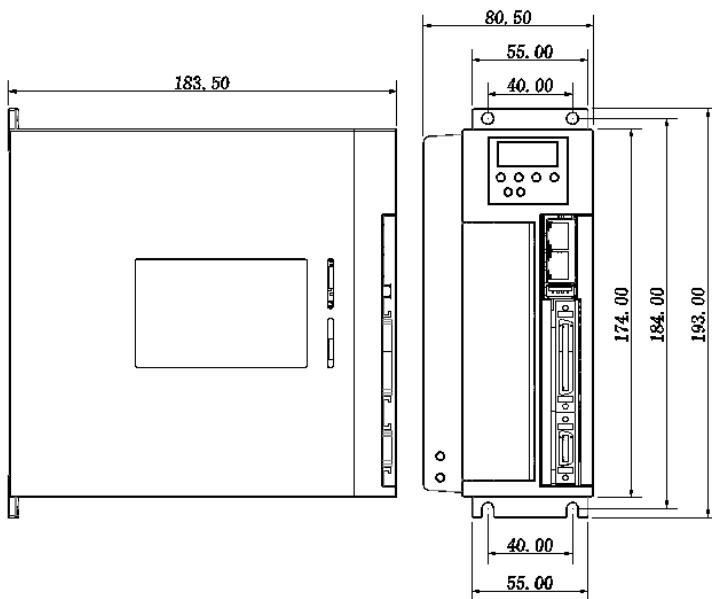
RT10-EA030L appearance and dimensions (Unit, mm)
